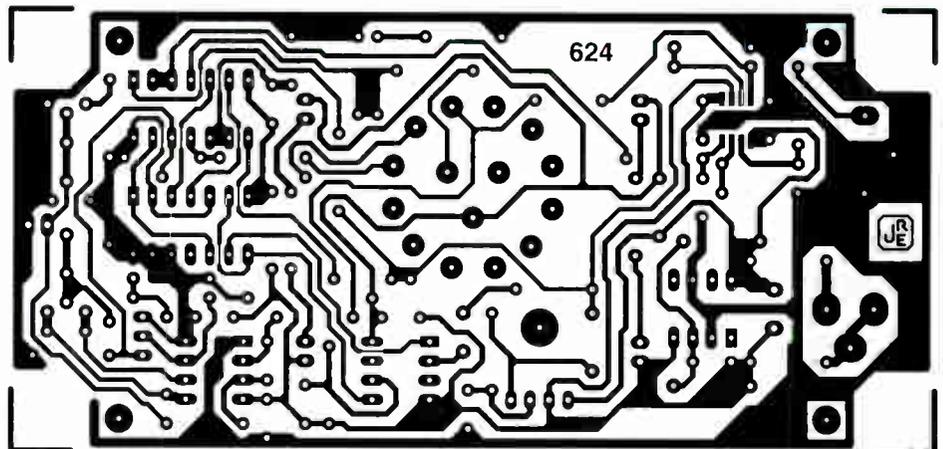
check your PC board for defects by comparing it with this full-size etching pattern before installing any of the parts.
